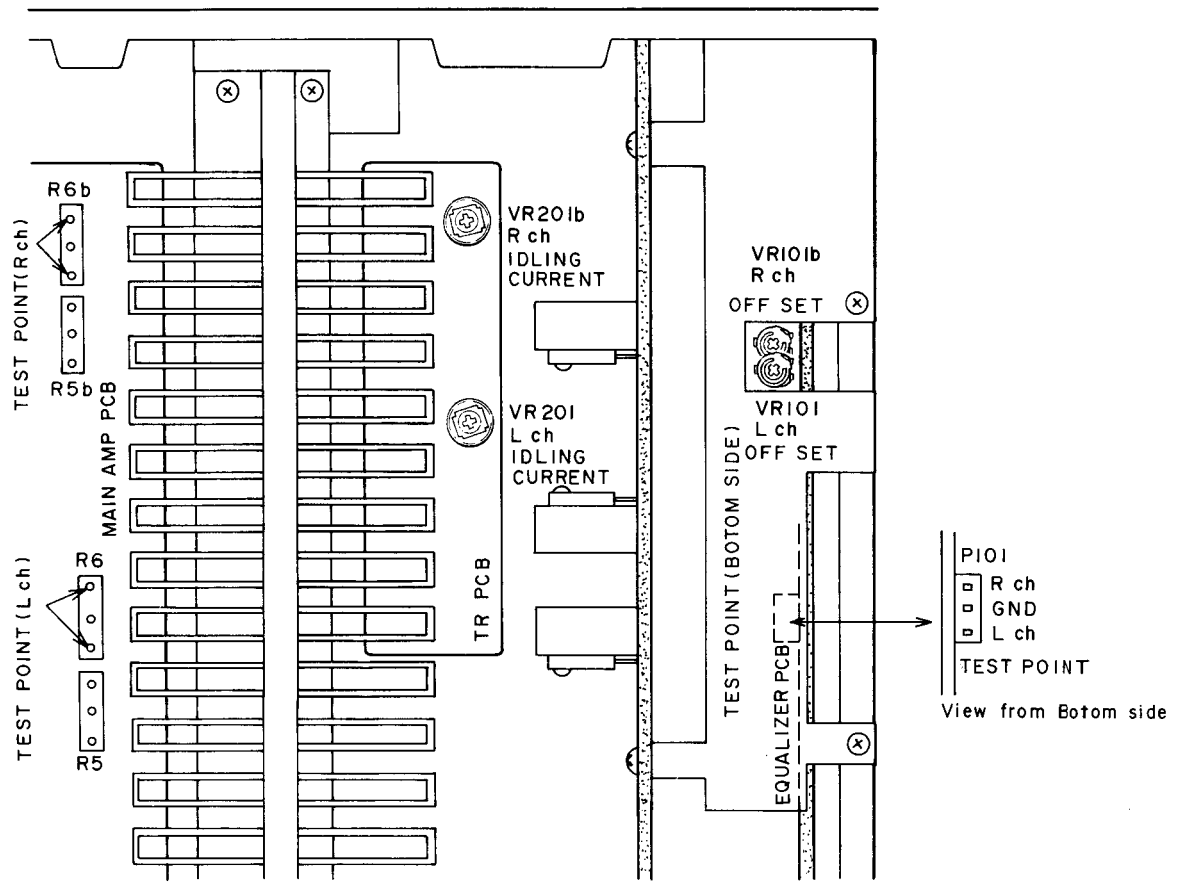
Idling current, OFF-SET Adjustment parts and Test points
